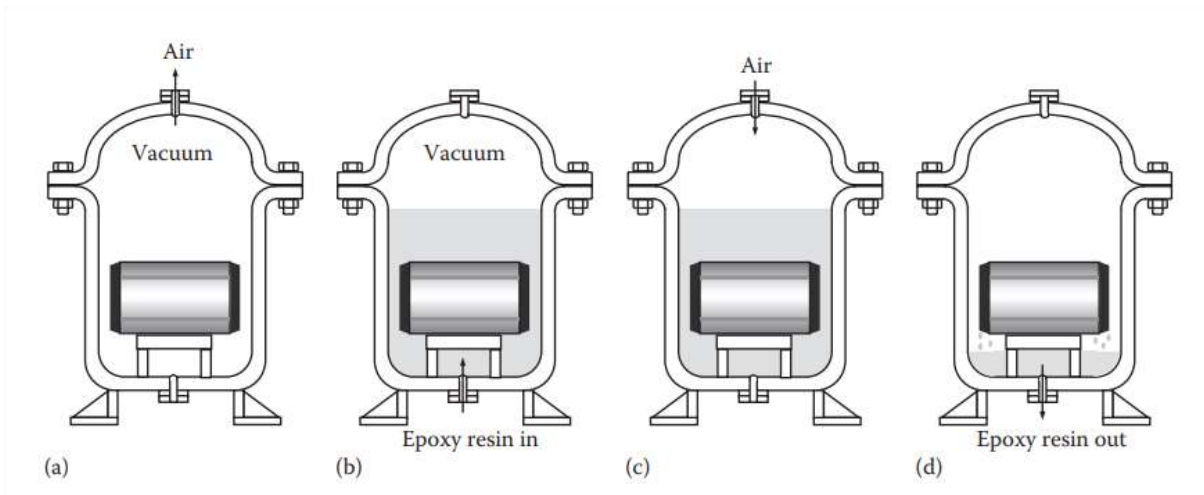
VPI process: (a) evacuating the container into deep vacuum, (b) introducing epoxy resin into the container until the stator is completely submerged, (c) releasing the vacuum of the container and applying pressure over the resin-covered stator to force resin completely into the stator, (d) draining epoxy resin out of the container, and (e) placing the stator into an oven and baking it for curing the epoxy resin (not shown). [7]
